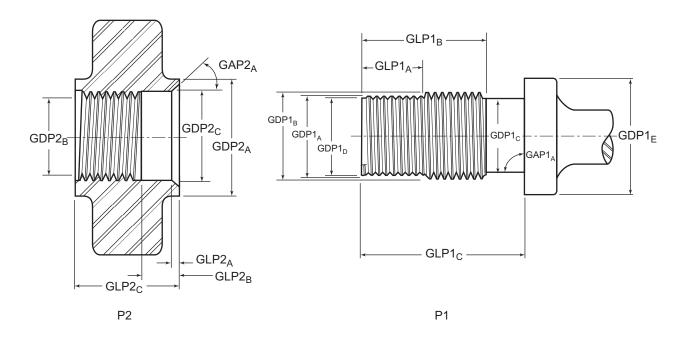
Go Pin-thread Gauges (For Gauging Polished Rod Pin Connections)
